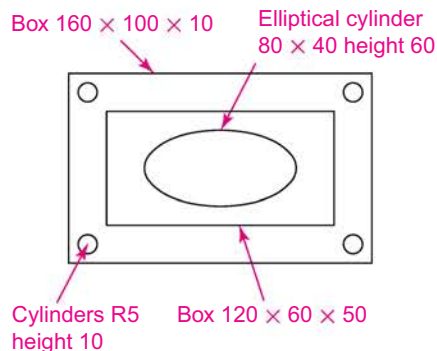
Example – Chamfer and Fillet – sizes for the model
